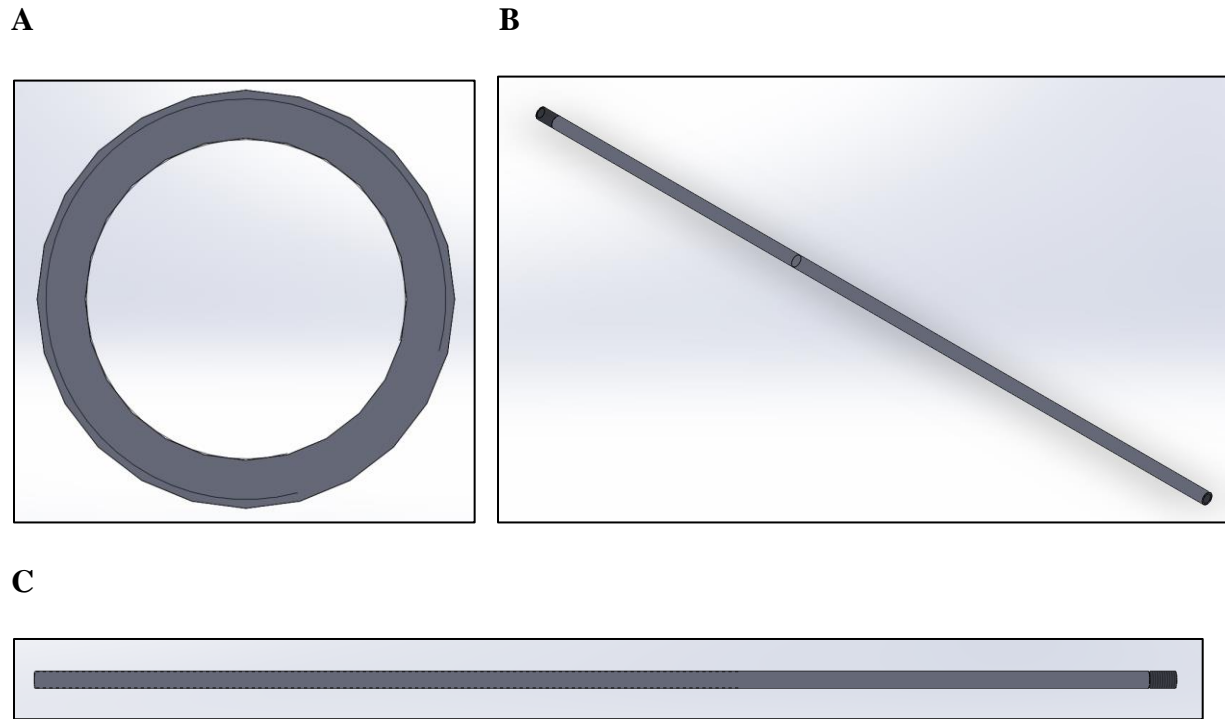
CAD drawings of endoscope housing. A. Front-face view. B. Isometric view. C. Side-view.
